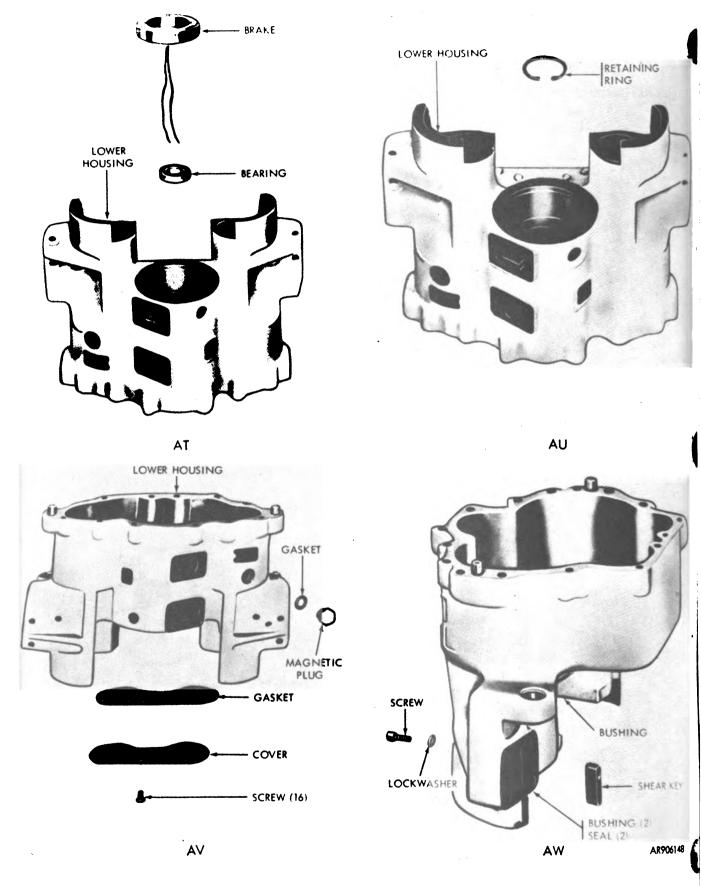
Traversing gearbox disassembly or assembly (15 of 15).
